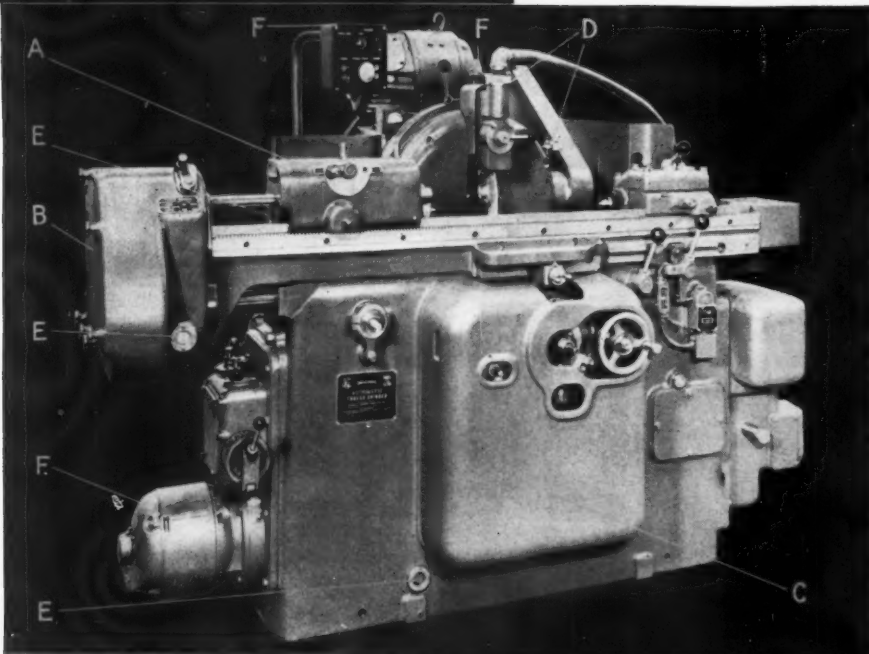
(Center) Lubrication chart for a Jones & Lamson automatic thread grinding machine. "A" — is the headstock and "B" the change gear housing, both of which require a high grade heavy-medium machine oil. The Spindle oilers "D" require a high quality 150 SSU viscosity (at 100°F.) spindle oil; "E" indicates sight gages which should be checked daily. "F" are motor bearings, check monthly.
